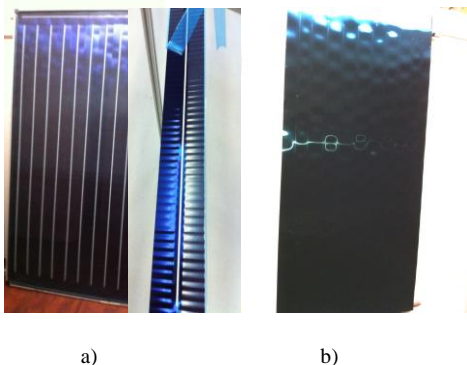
Standard types of absorber welding: a) ultrasonic; b) laser. [Contact points and lines are initiators for corrosion.].
